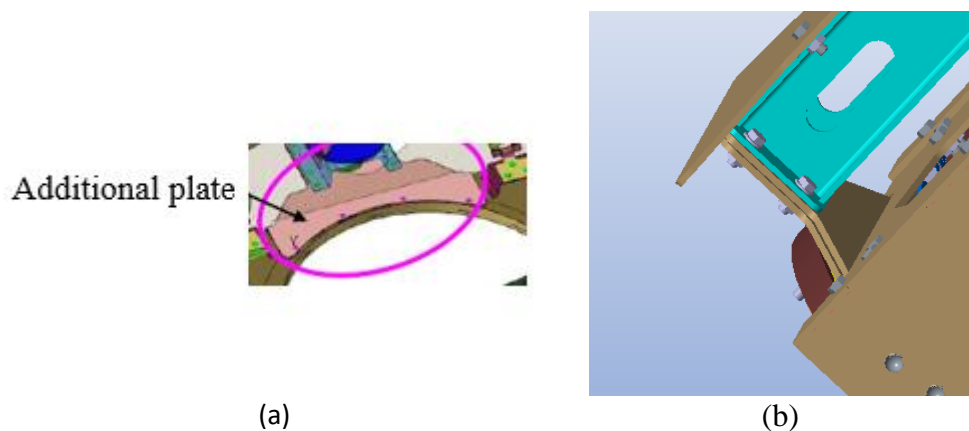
(a) Position of addition of armoured plate and (b) View showing the addition of armoured plate bolted with the gun mount
